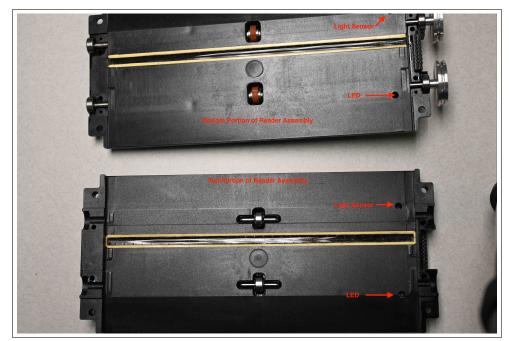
Reader assembly with top and bottom components separated. Note, this photo does not depict the device under test.
